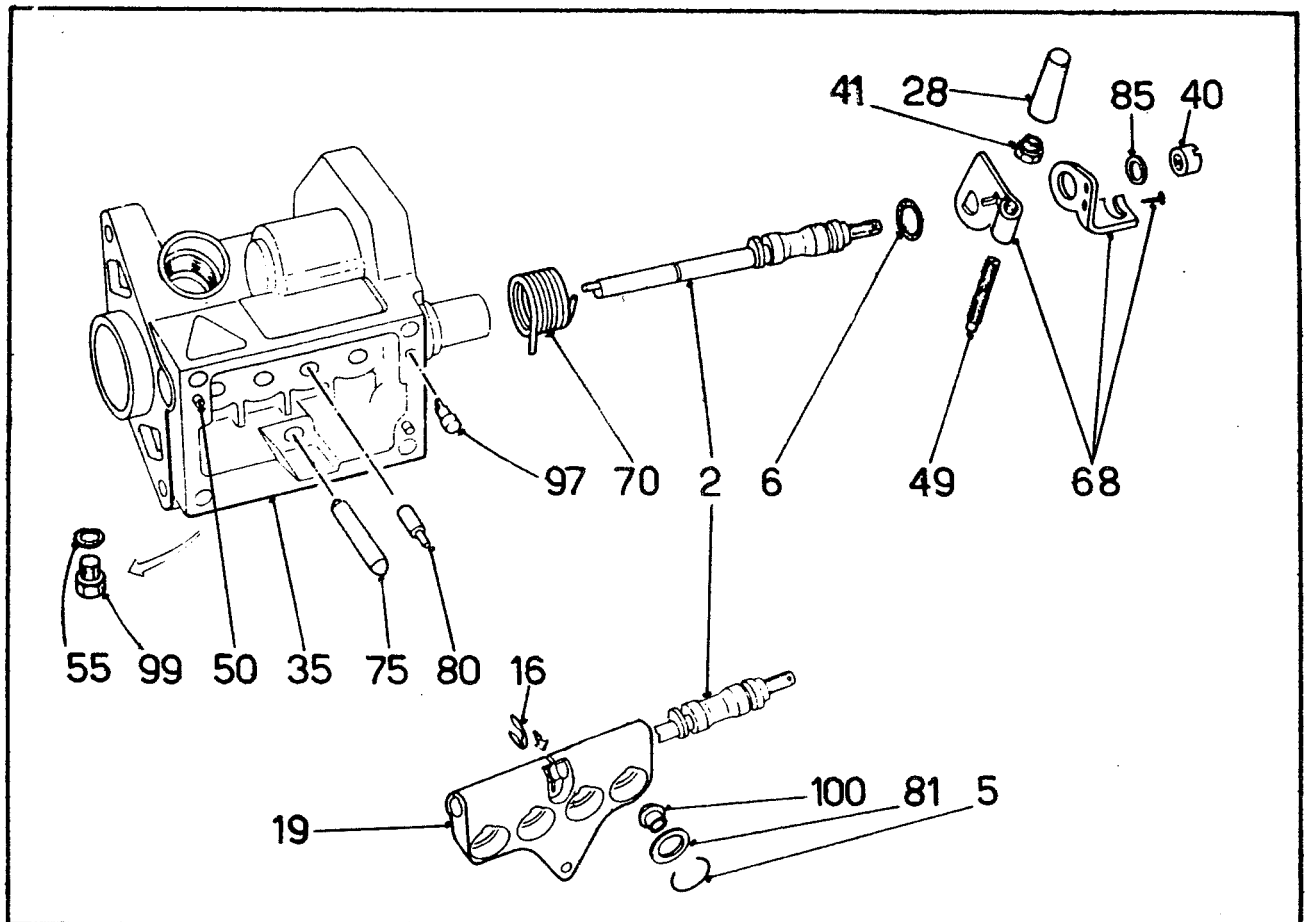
Eccentric Shaft, Regulating Rocker, Tappets and Cam Follower Pin
